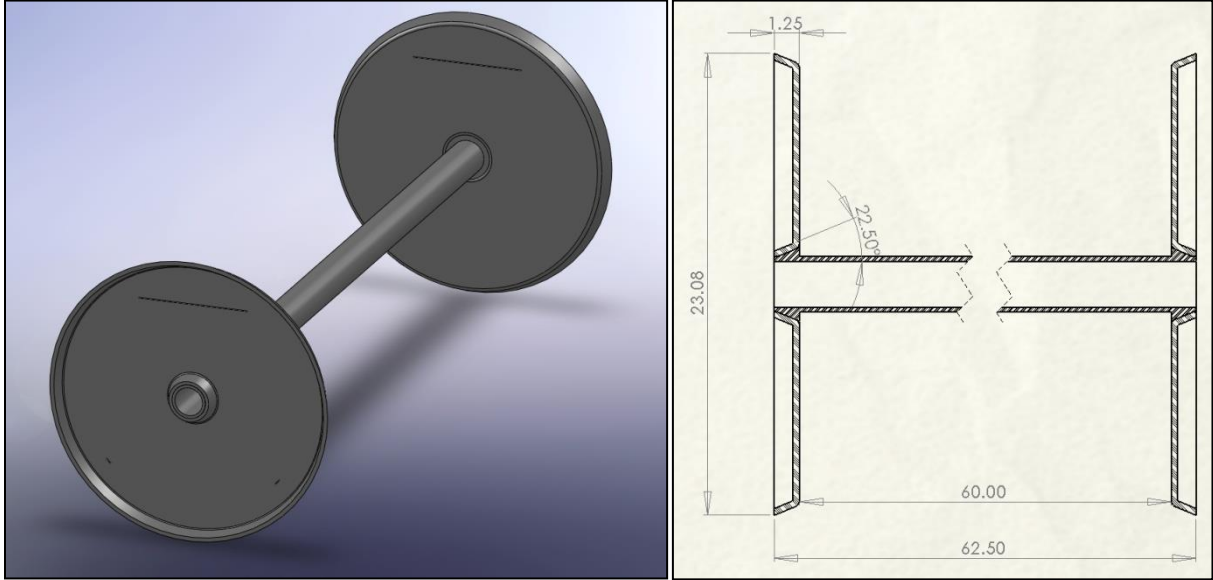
Wheel and axle sleeve assembly that forms the spool of HDPE tubing.
